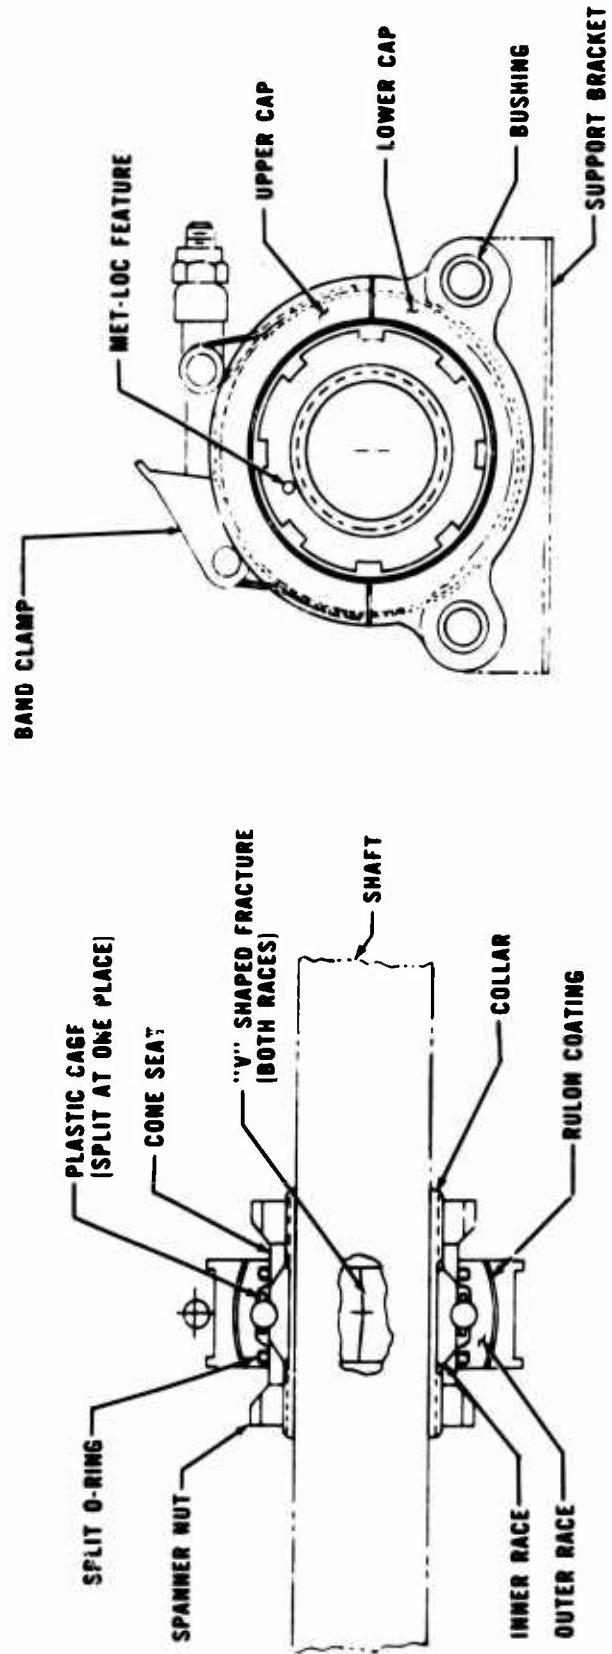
Selected Candidate, Split Hanger Bearing Design.
